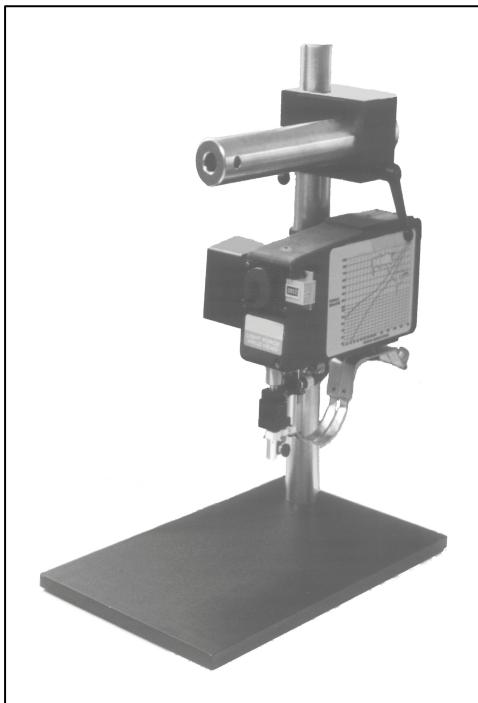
Model 50MF Light Force Weld Head (Typical)
